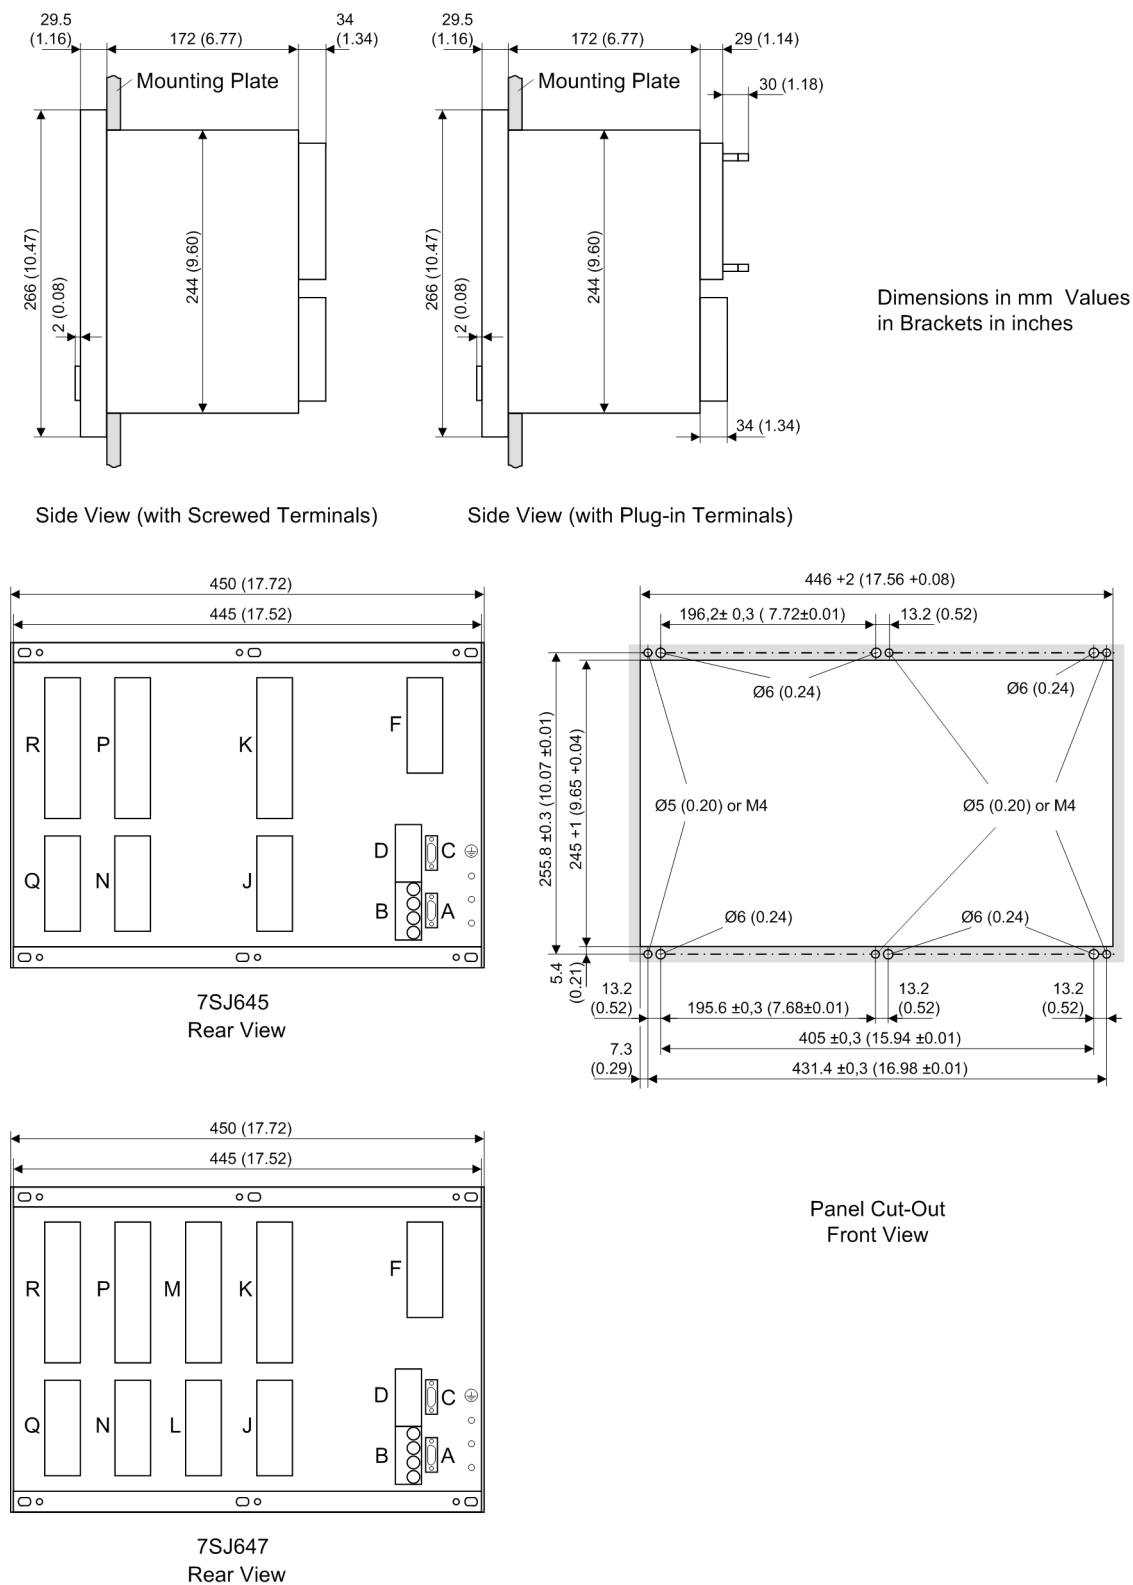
Dimensional drawing of a 7SJ64 for panel flush and cubicle mounting (housing size 1/1)
